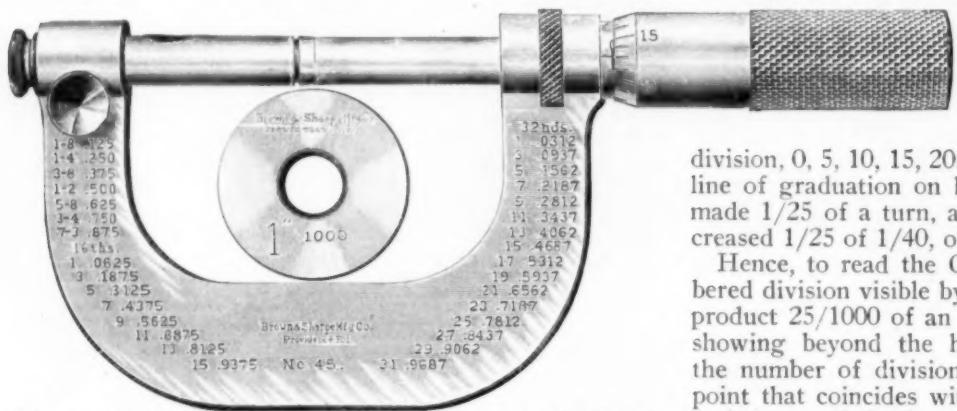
MICROMETER CALIPER NO. 45, MANUFACTURED BY BROWN & SHARPE MANUFACTURING COMPANY, PROVIDENCE, R. I.
